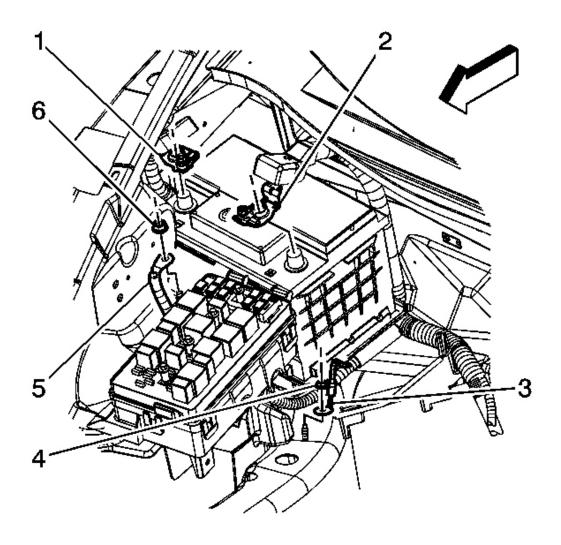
View Of Battery & Related Components Courtesy of GENERAL MOTORS CORP.
